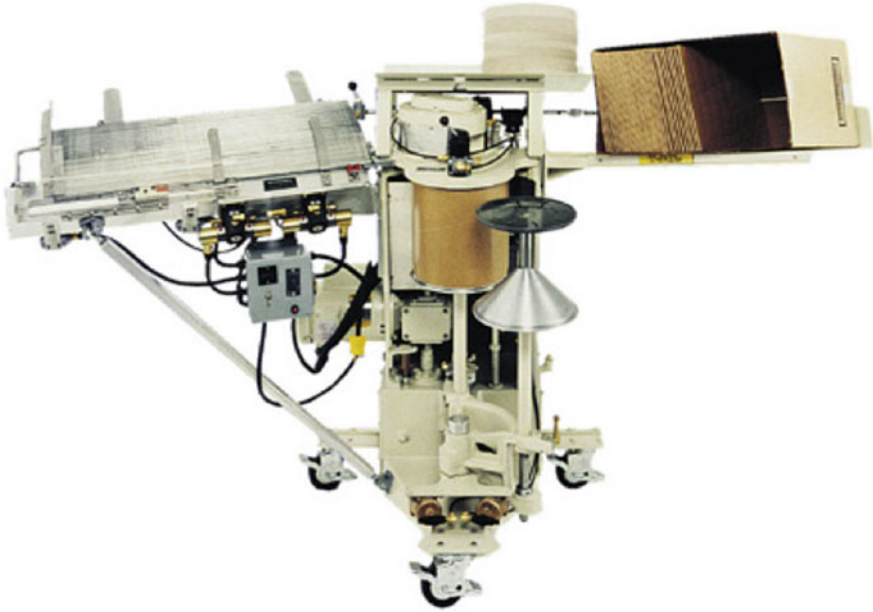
Forming machine for 1-gal (4-L) to 6-gal (24-L) sizes of bulk containers. Produces up to 480/h as it semiautomatically attaches sidewalls and bottom together with seam holders formed from flat metal strips (courtesy of Huhtamaki, Inc., DeSoto, KS)
